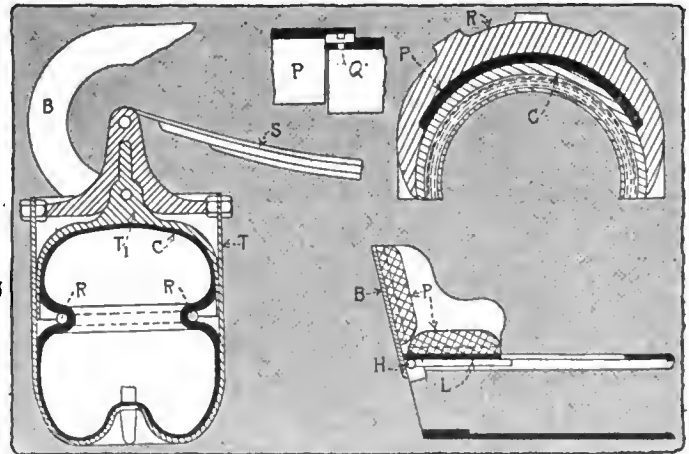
Spyker pneumatic shackle. Fig. 24—Harris tire reinforced by metal plates. Fig. 25—Radford automobile seat
